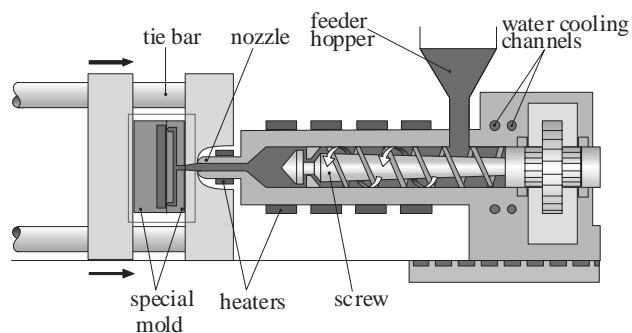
Injection moulding machine with indication on replaced mould as a key-unit in N-CIM
